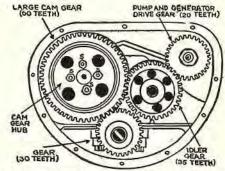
Gears on the front of the Reo model "T6" and "U6" engine.
